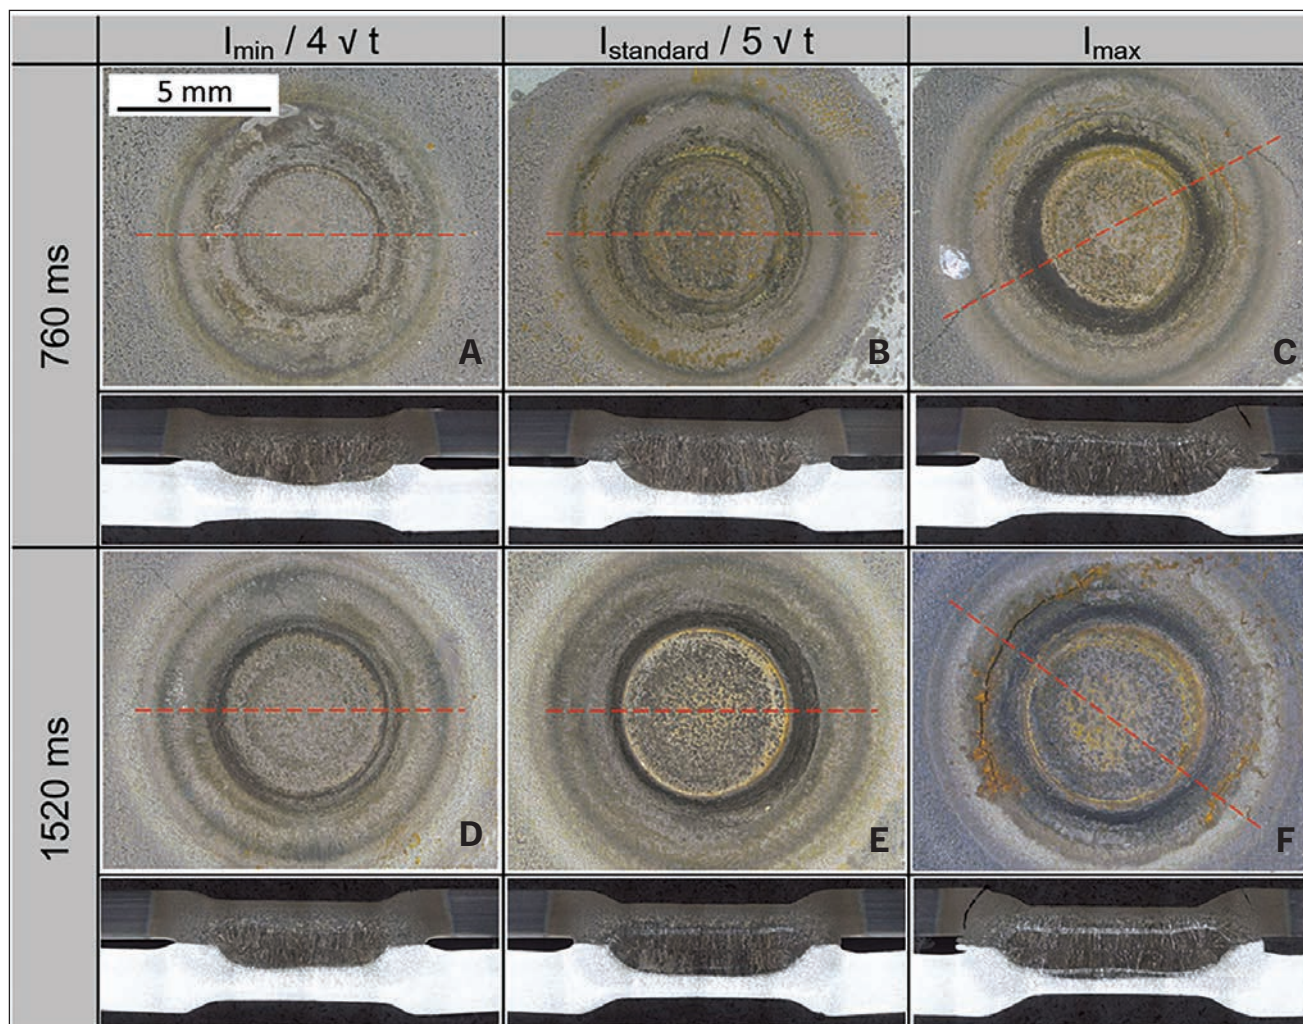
Representative top views and metallographic cross sections for welding processes A–F: Shoulder cracking (type C) is visible for processes C and F, but no cracks are visible for welding processes A, B, D, and E.
